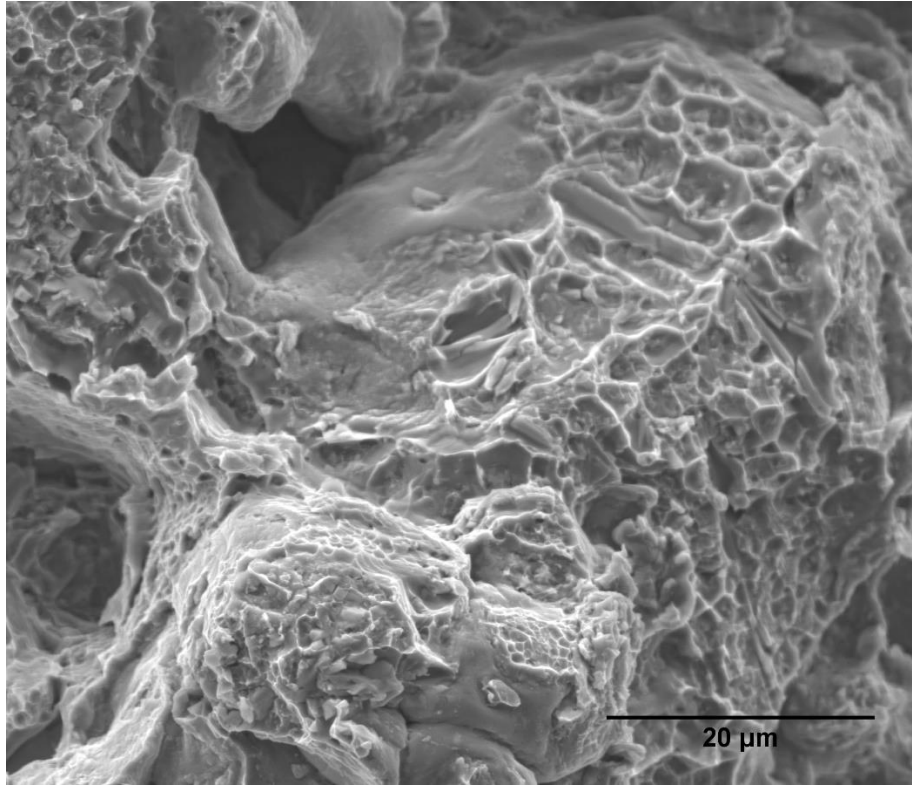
Fracture surface showing ductile tearing Al-A
